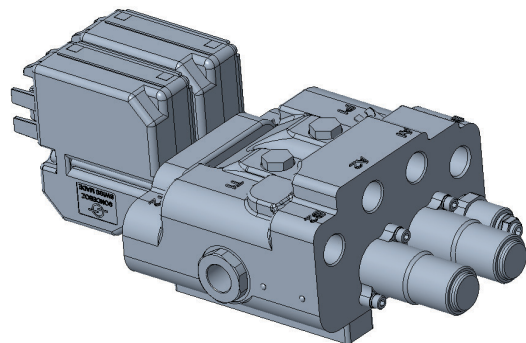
Stepper Motor Actuated Hydraulic Valve
